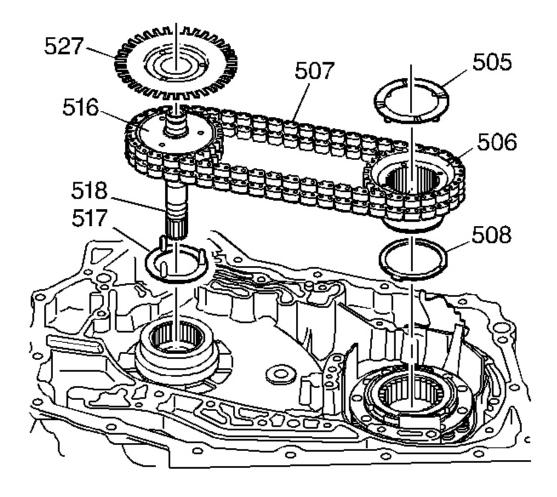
View Of Drive Link Assembly & Sprockets Courtesy of GENERAL MOTORS CORP.
